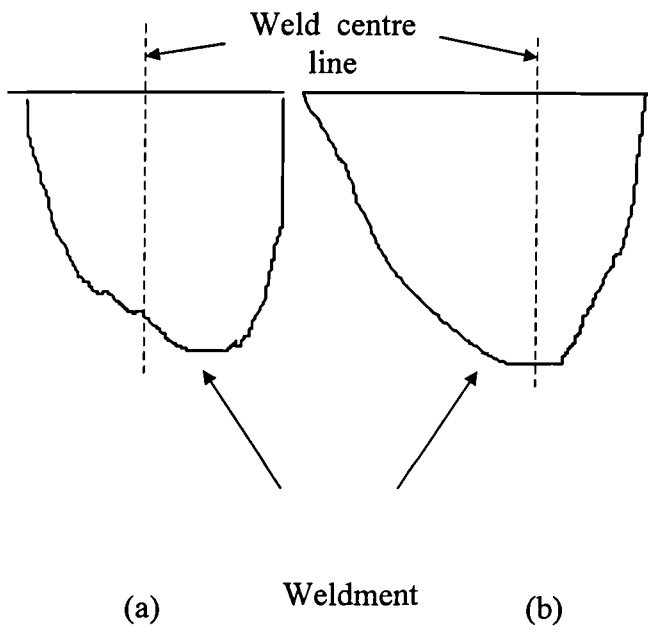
(a,b) : Sketch of alignment of weld bead relative to the weld centre line
